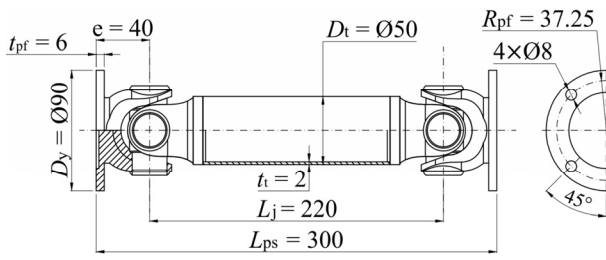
Drawing of Gewes KZ 47 propeller shaft
